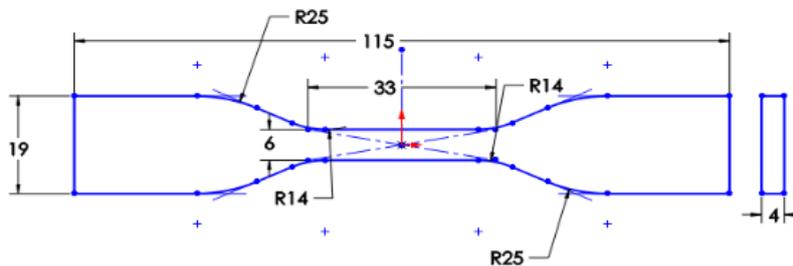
CAD model of tensile specimen as per ASTM D638 type IV [20]
